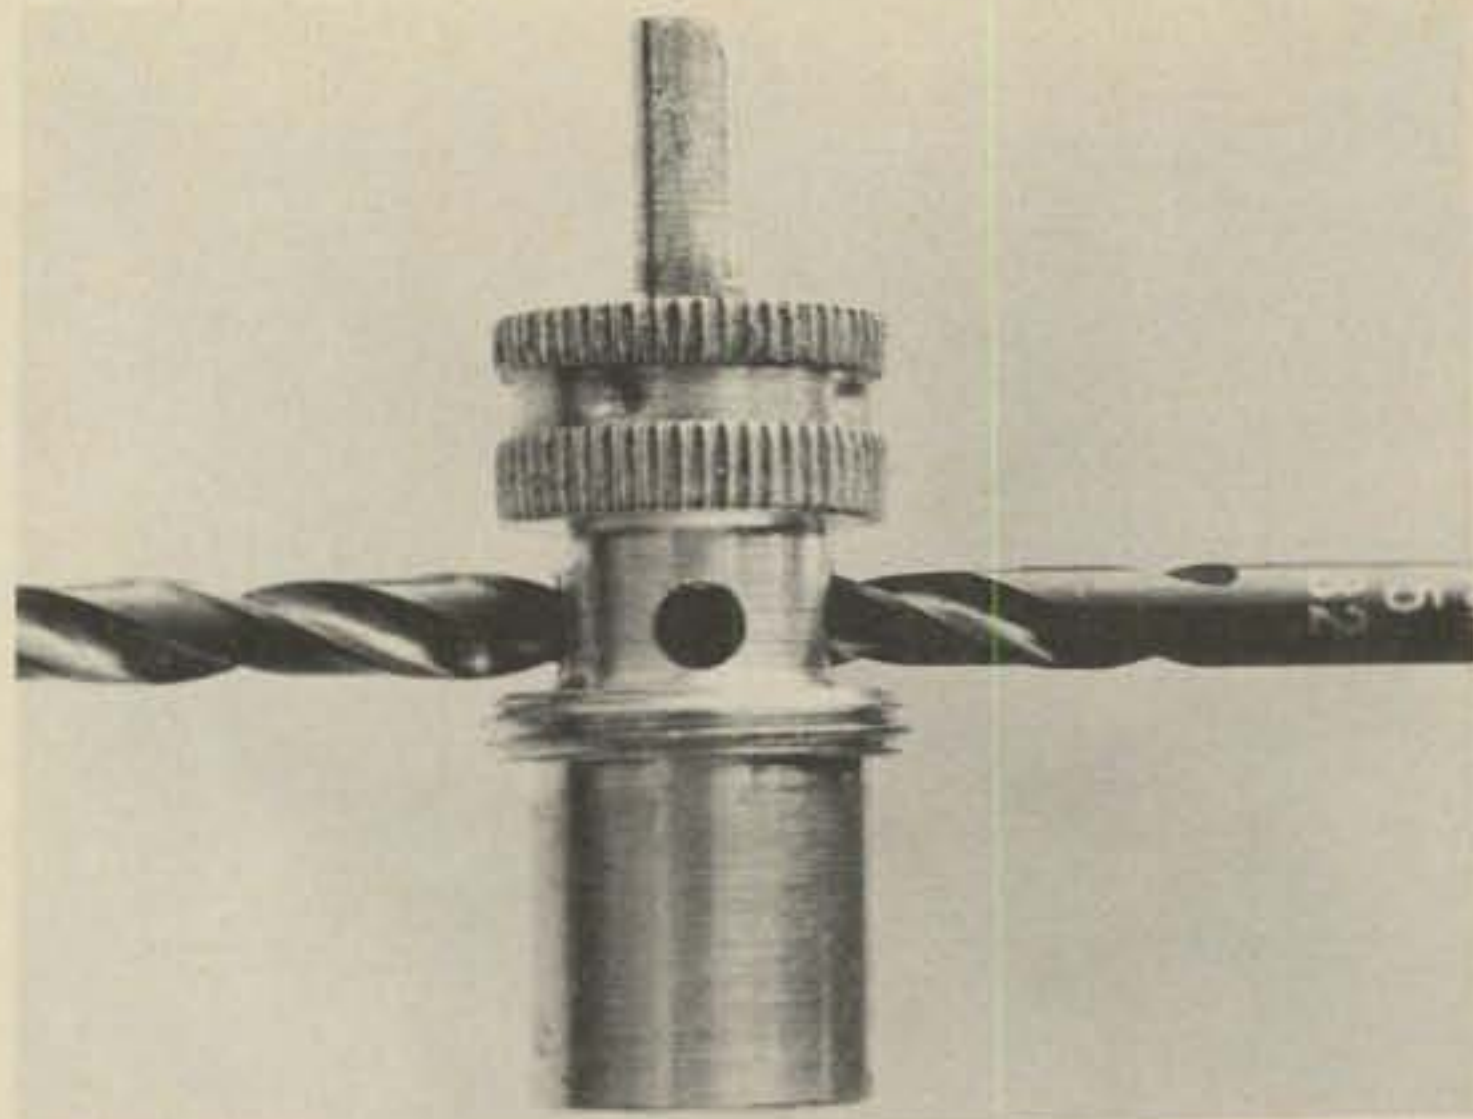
Enlarging the holes on the PL-259 male connector with a 5/32 drill makes it easier to solder to the shield and thus provides improved contact.
